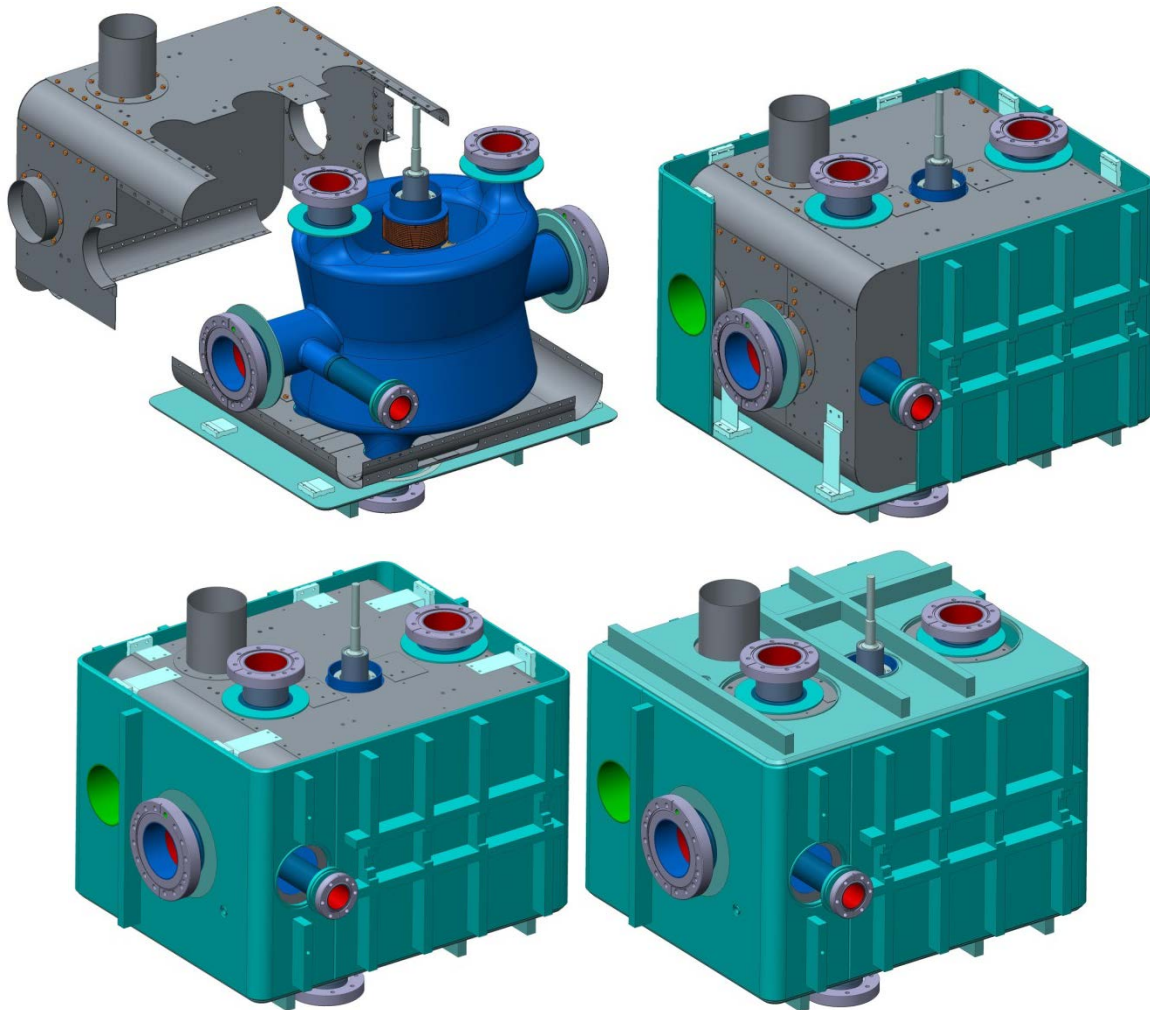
Some stages during the assembly of cold magnetic shield inside the helium vessel
